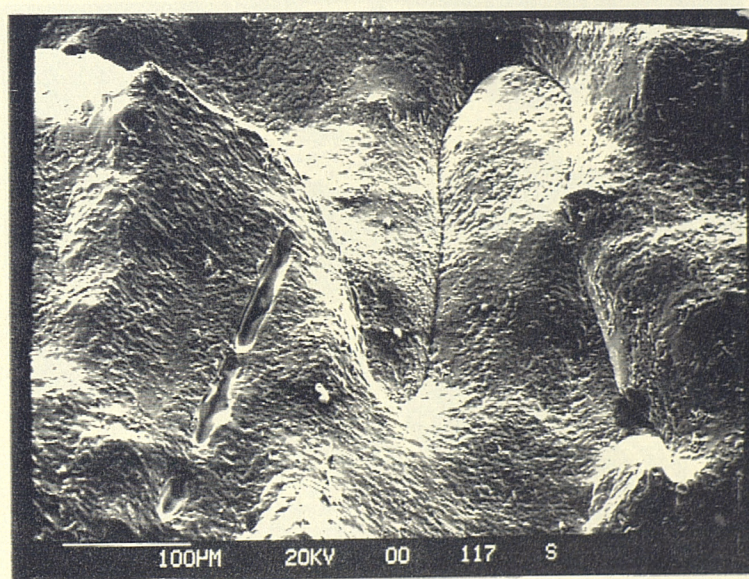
Weld induced crack fracture surface in WBL-3794 illustrating shrinkage pores and dendritic structure. x170.
